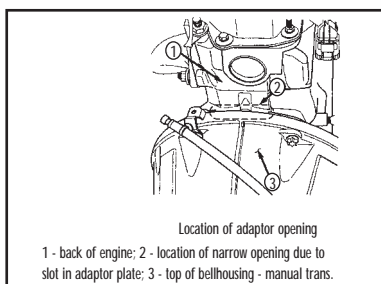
To repair rear main seal-leaks in Chrysler 4.0L engines apply liberal bead of RTV sealer to area.
